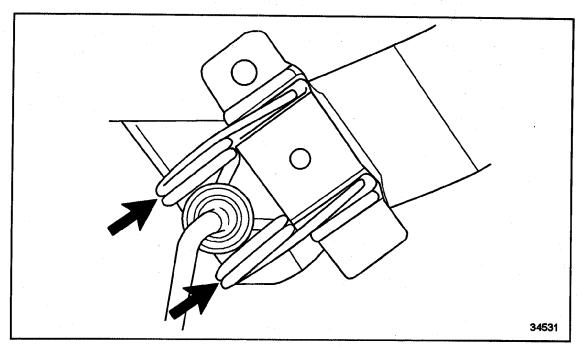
Installing the Slave Piston Assembly Torsion Spring
